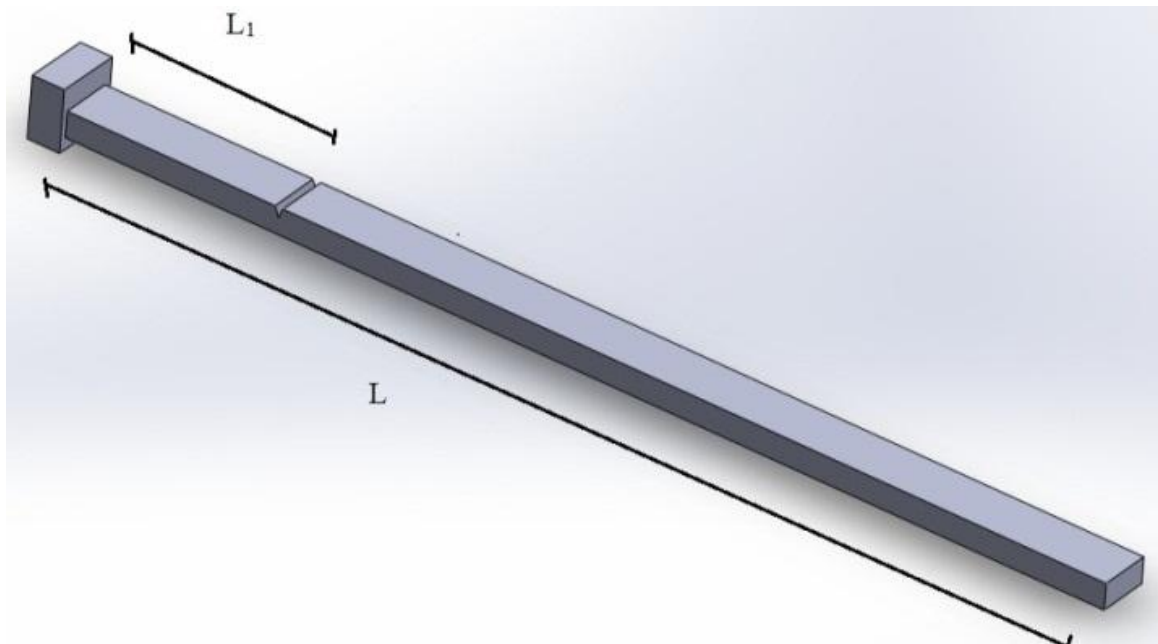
Schematic diagram of a composite cantilever beam with a crack
